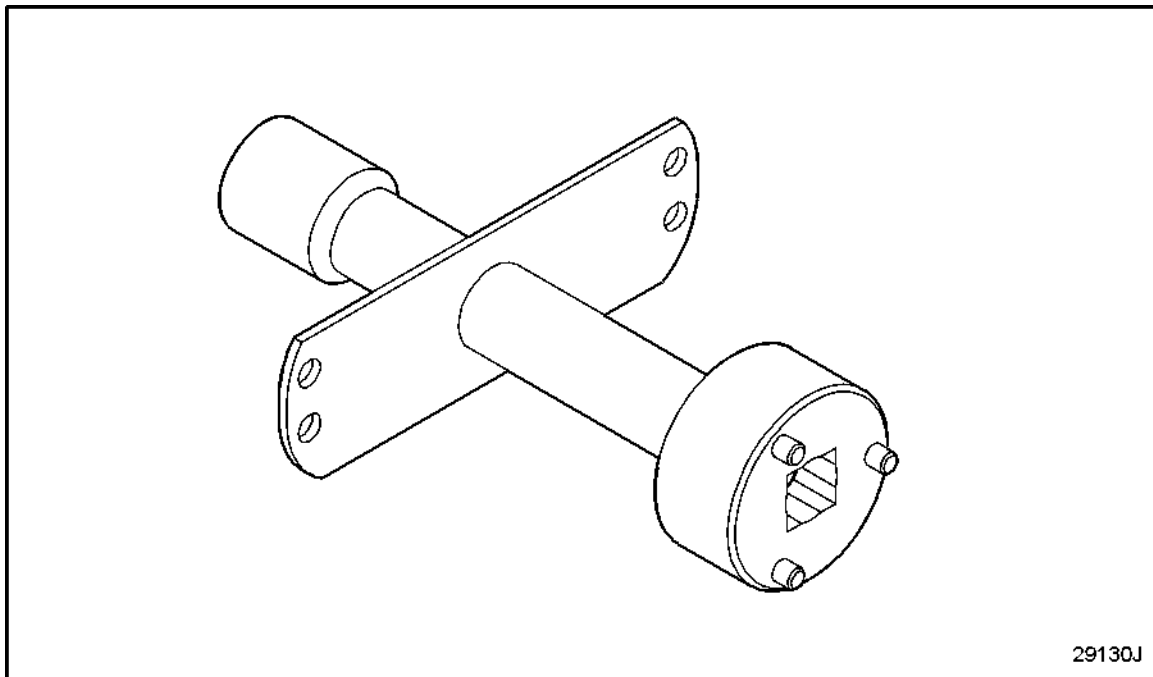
Aftercooler Adaptor Plug Rem/Inst, J 25275
